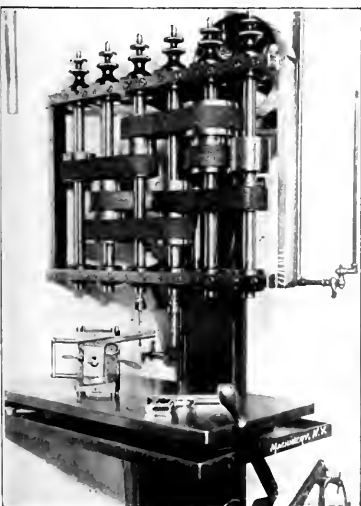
Six-spindle Drill Press; Drilling Receiver for Magazine.
